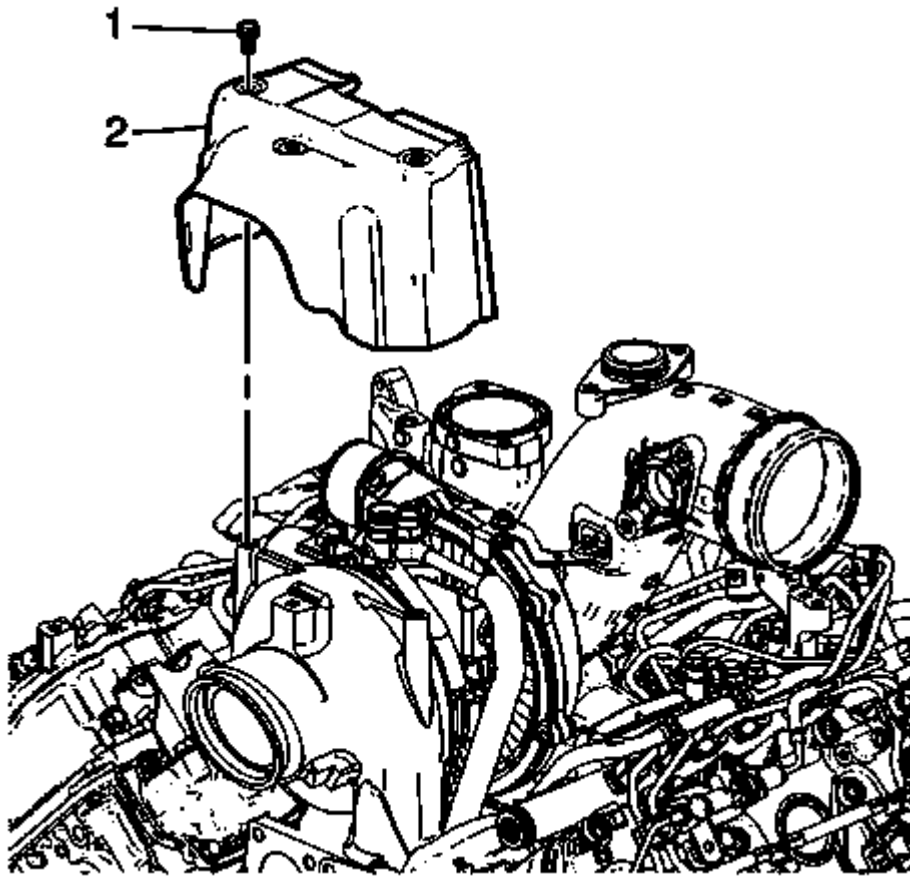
Turbocharger Upper Heat Shield And Bolts
